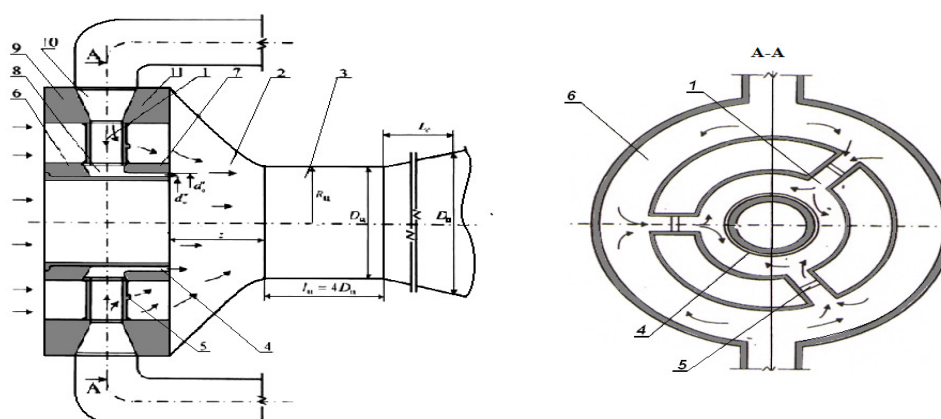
Diagram of the jet ring two-surface pump: 1 – pipe connecting; 2 – inner chamber; 3 – mixing chamber; 4 – active nozzle; 5 – gap between the nozzles; 6 – inner rear flange; 7 – inner front flange; 8 – ring internal collector; 9 – rear outer flange; 10 – outer annular collector; 11 – front outer flange
